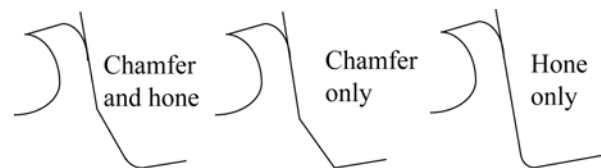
TYPES OF CUTTING EDGE GEOMETRY USED IN CBN TOOLS [14]
